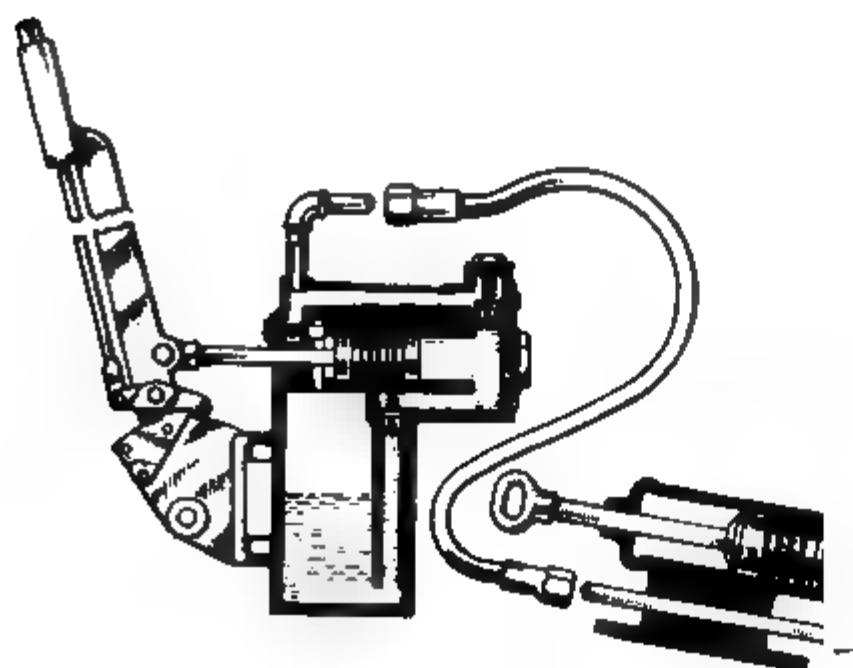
Layout of Hydraulic Brakes Used on Knox Tractor
